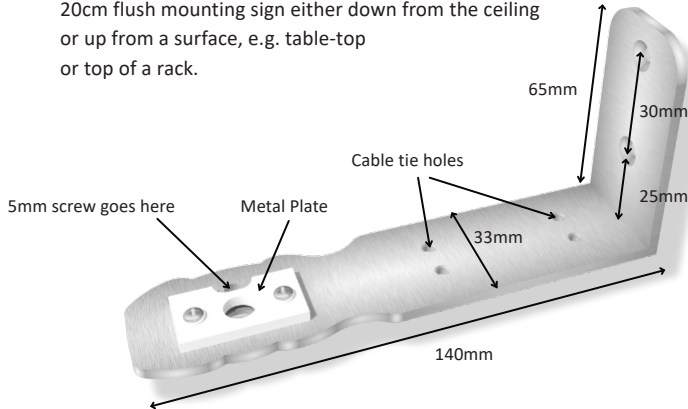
LD-KC1 Ceiling Mounting Kit
